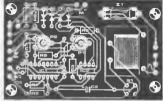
The printed circuit board and component leyout for the linear thermometer. Provision has been made to mount a small transformer on the board.
